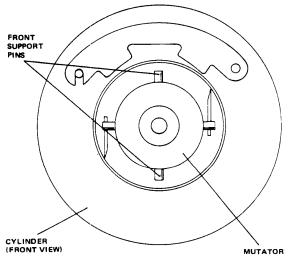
Front Product Inlet/Outlet Assembly Removal
